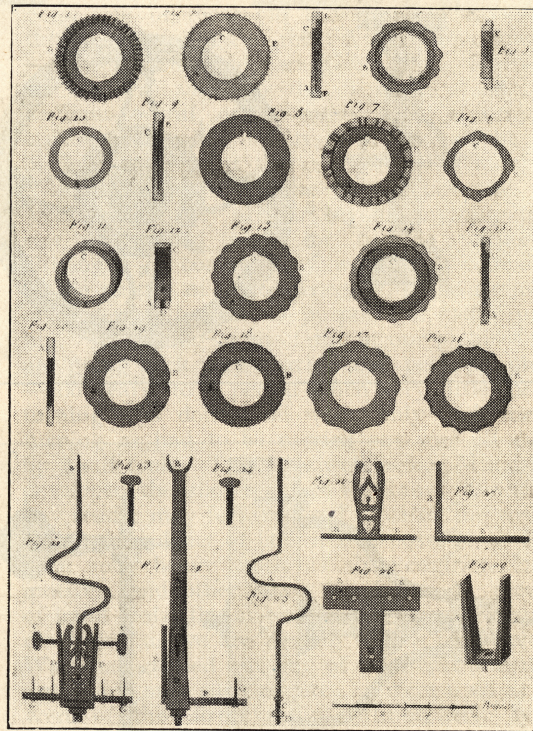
Plate VI.—Types of Rose Cams and Details of Traversing Mandrel Spring Gear.
